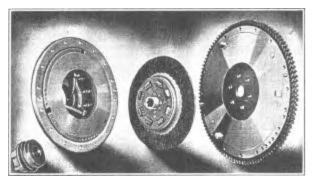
Triple Sealed Oil-cushioned Clutch Parts
